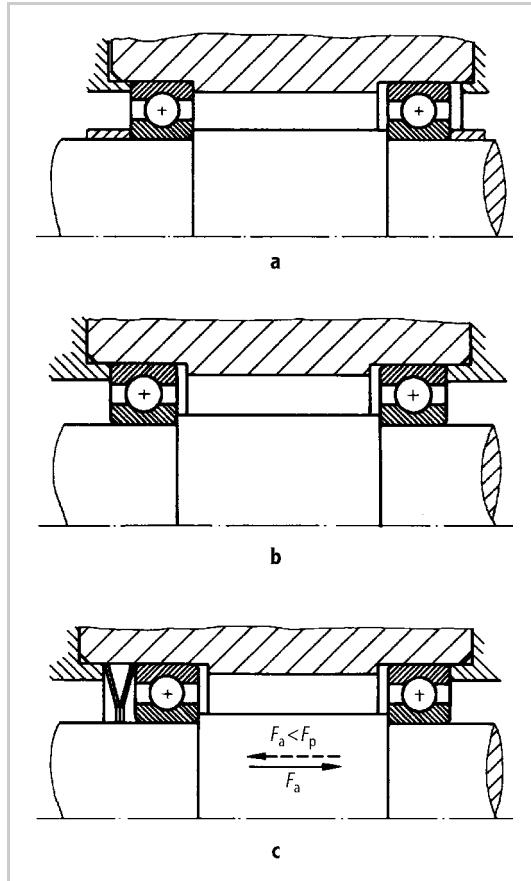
Basic bearing arrangements: a Locating and nonlocating arrangement: left-hand locating bearing takes up all the axial forces, right-hand sliding bearings permit unimpeded axial movement due to thermal expansion; accurate calculations are possible. b Stepped bearing arrangement: the axial loading of the bearings depends on the preload and thermal expansion and cannot be clearly determined; a modification is the “floating arrangement” in which the bearings are provided with axial clearance; in that case, thermal expansion is possible to a limited extent but there is no precise shaft location. c Spring-loaded bearing arrangement: here the disadvantages of the stepped bearing arrangement are largely eliminated, though the constantly applied axial load may reduce the bearing life; forces resulting from thermal expansion can be determined by spring force deflection diagrams; the shaft is located precisely provided the axial force F_a acts only towards the right or does not exceed the preloading F_p
